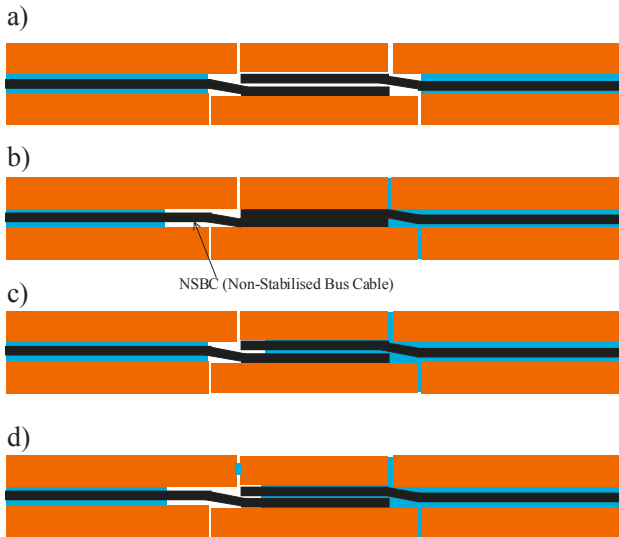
Schematic view of four different types of defective splices: a) Non-soldered, b) Soldered with outside void, c) Partially soldered with inside void, d) Badly soldered with void and some SnAg solder in between the bus stabiliser and the splice stabiliser.
